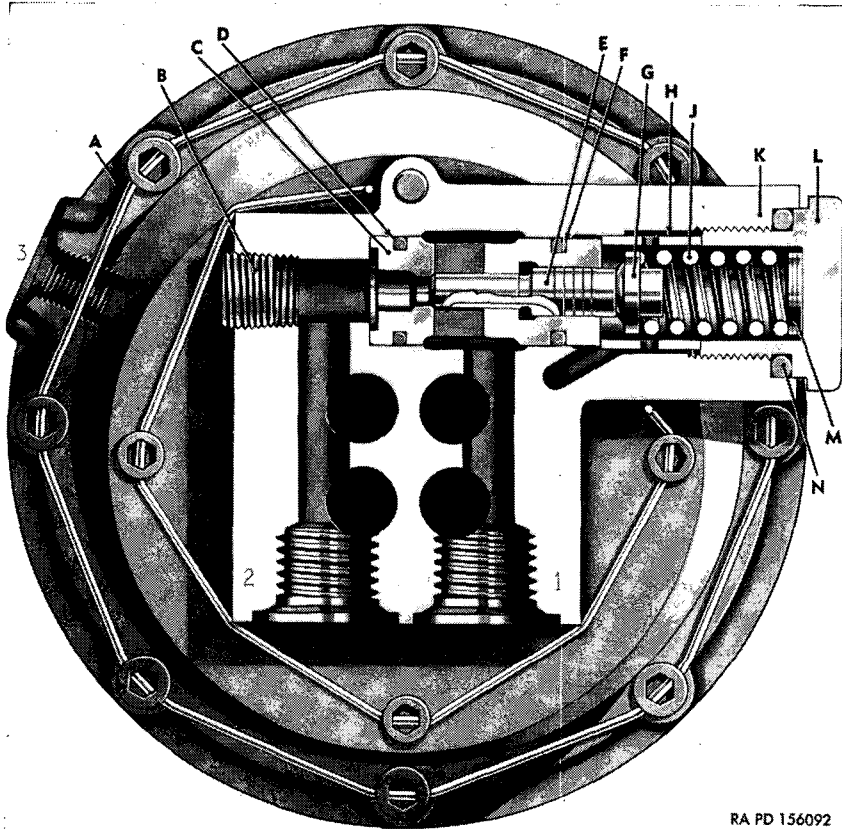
Constant-displacement hydraulic traversing motor—front elevation cross section.
